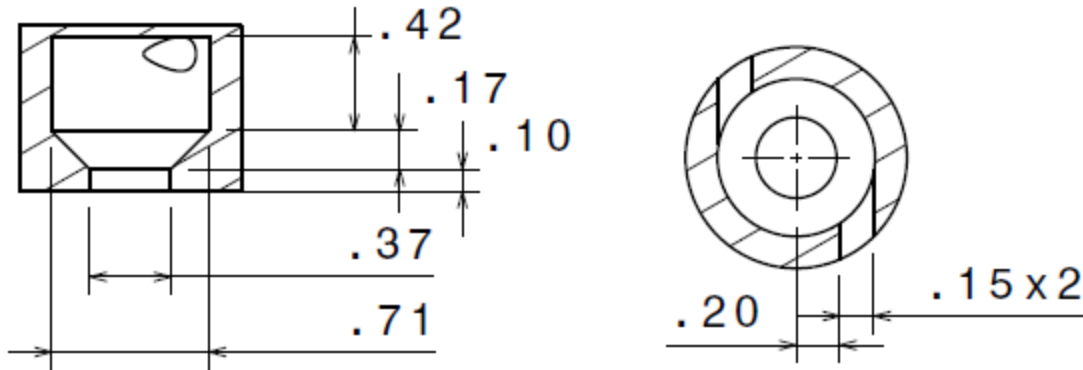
First Swirl Injector Designed. Dimensions in Inches
